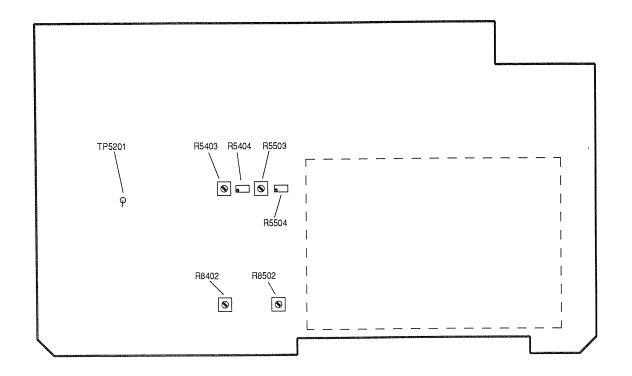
DCX-127 MAIN BOARD TEST AND ADJUSTMENT POINTS
